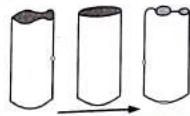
Earing in cup drawing (the arrow indicates rolling direction).
